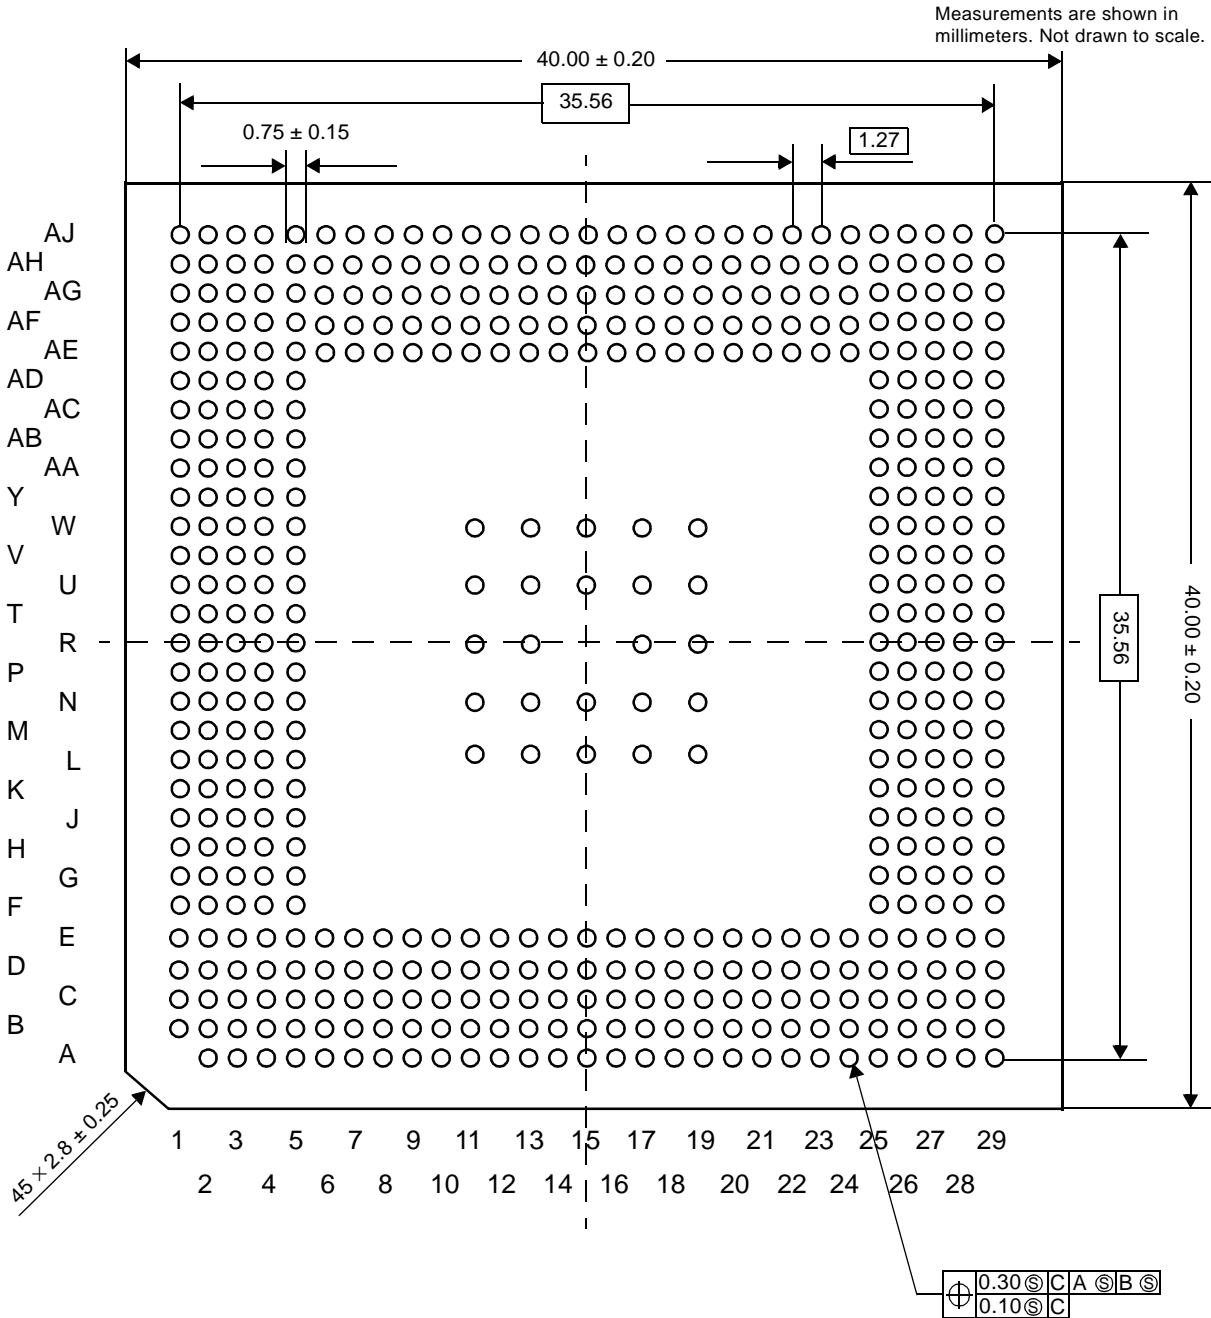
(parts 1 and 2) shows the 503-pin Enhanced Plastic Ball Grid Array (EPBGA) package used for the QRT. The package measurements are shown in millimeters.
